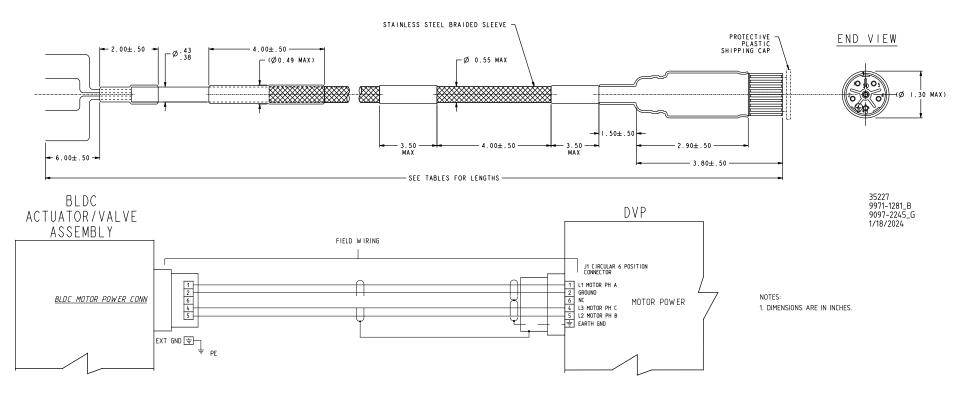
Cable, 6-Pin Motor Power Straight Connector at Actuator to Flying Leads at DVP J1 Connector, for ELA7, ELA13 with DVP5000
